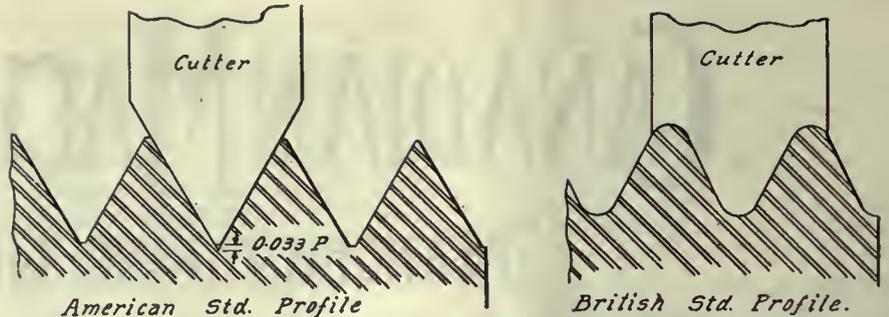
PROFILE OF AMERICAN AND BRITISH THREADS WITH CUTTERS.
